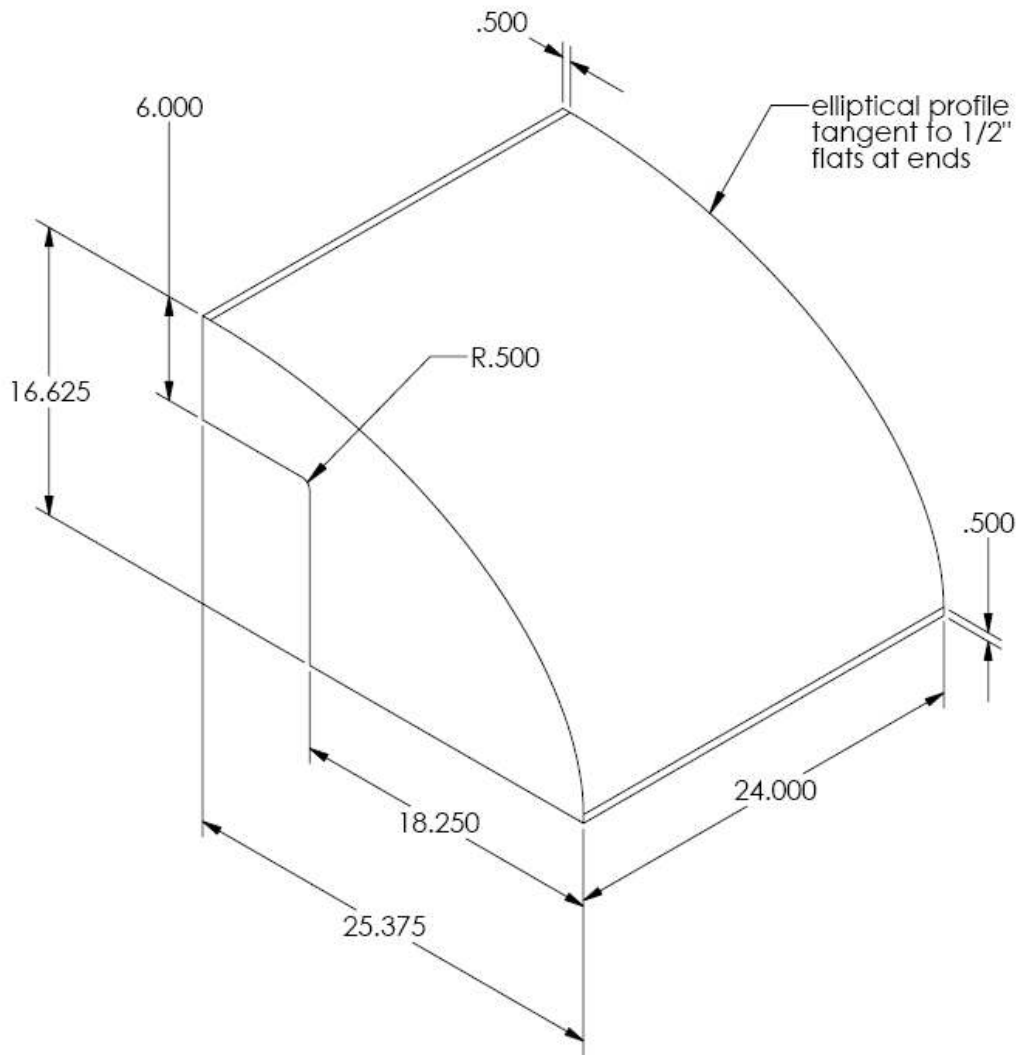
Transition wedges that line the open floor and ceiling of each anechoic chamber. All dimensions in inches.
